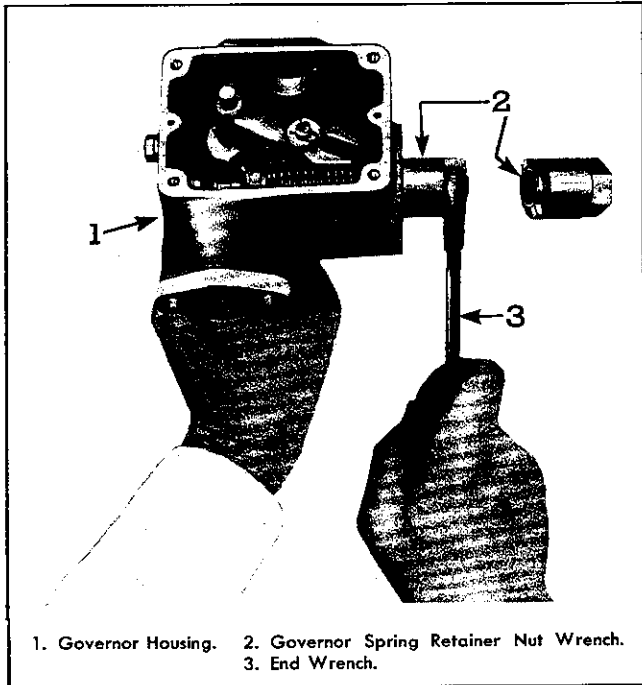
Removing Governor High Speed Spring Retainer Nut with Tool J-1652.
